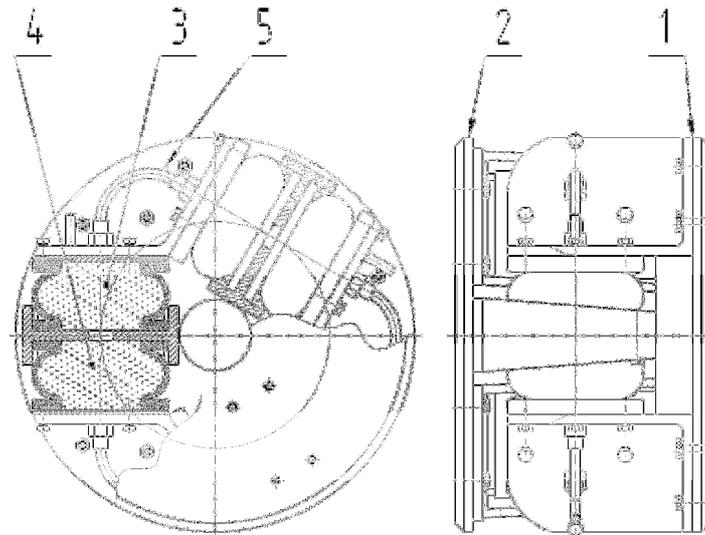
Real assembly of the pneumatic flexible differential shaft coupling
